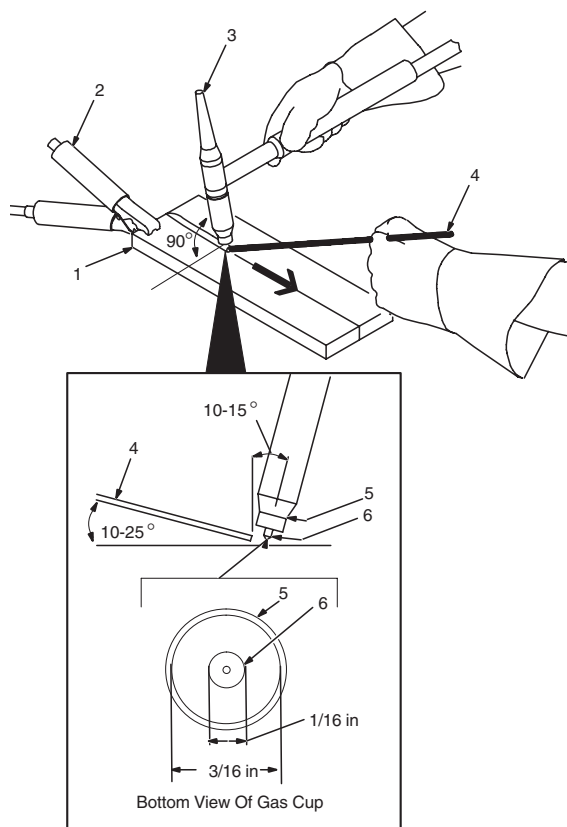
Gas cup size and torch positions. 1-Workpiece, 2-Work Clamp, 3-Torch, 4-Filler Rod (If Applicable), 5-Gas Cup, 6-Tungsten Electrode.
